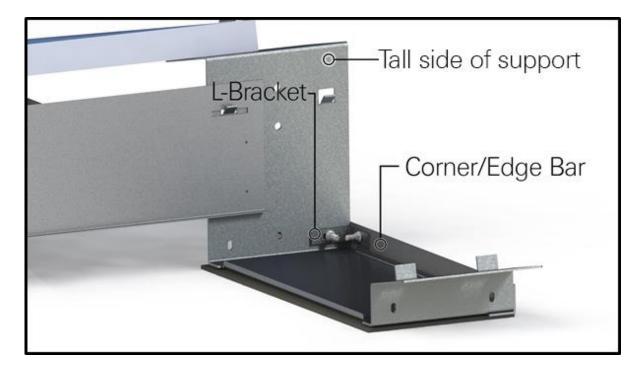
Edge/Corner Bar Installation with Accessory Bracket
